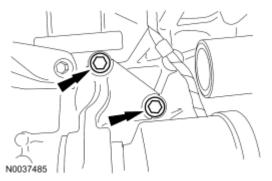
Locating RH Halfshaft Carrier Bearing Bracket Bolts Courtesy of FORD MOTOR CO.
